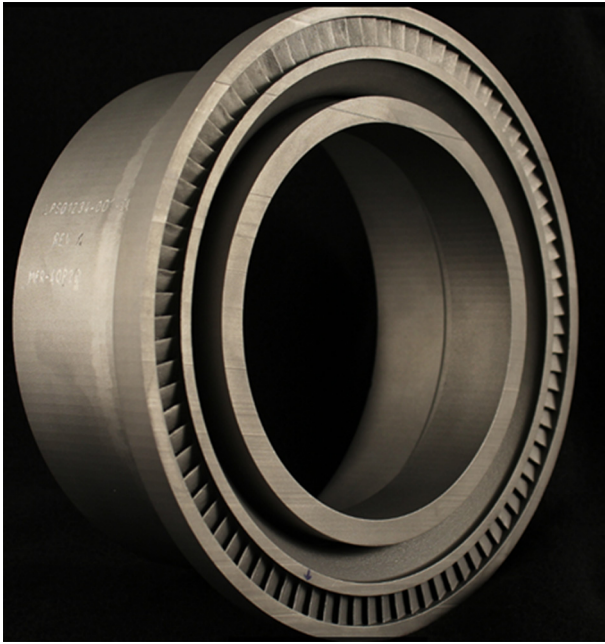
Additive Manufacturing Demonstrator Engine Liquid Oxygen (LOX) Turbopump Stator. Courtesy: NASA [127].
